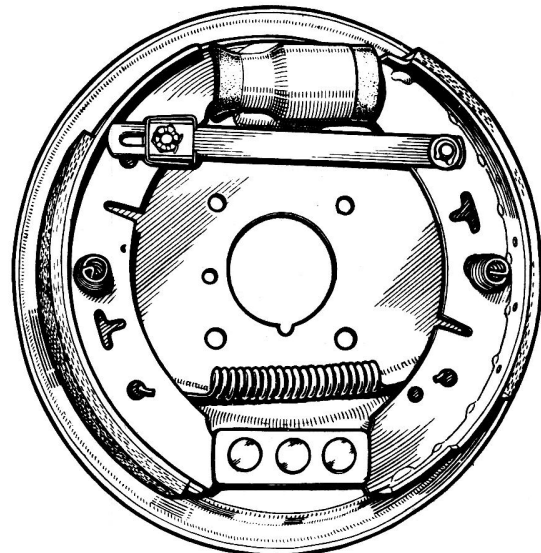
Drum brake front left hand (right hand similar but opposite way round)
